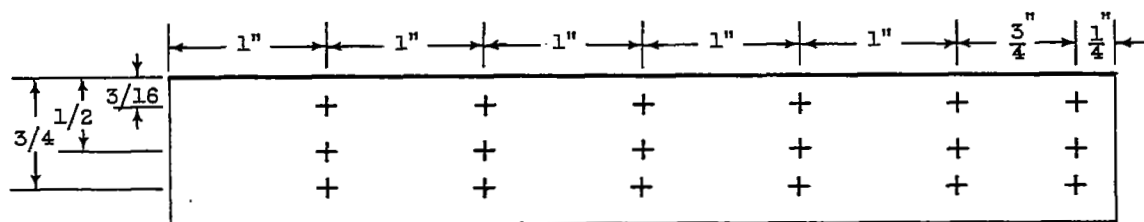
Detailed view of test section containing 1- by 6-inch rectangular ramjet combustor. (All dimensions in inches.)
